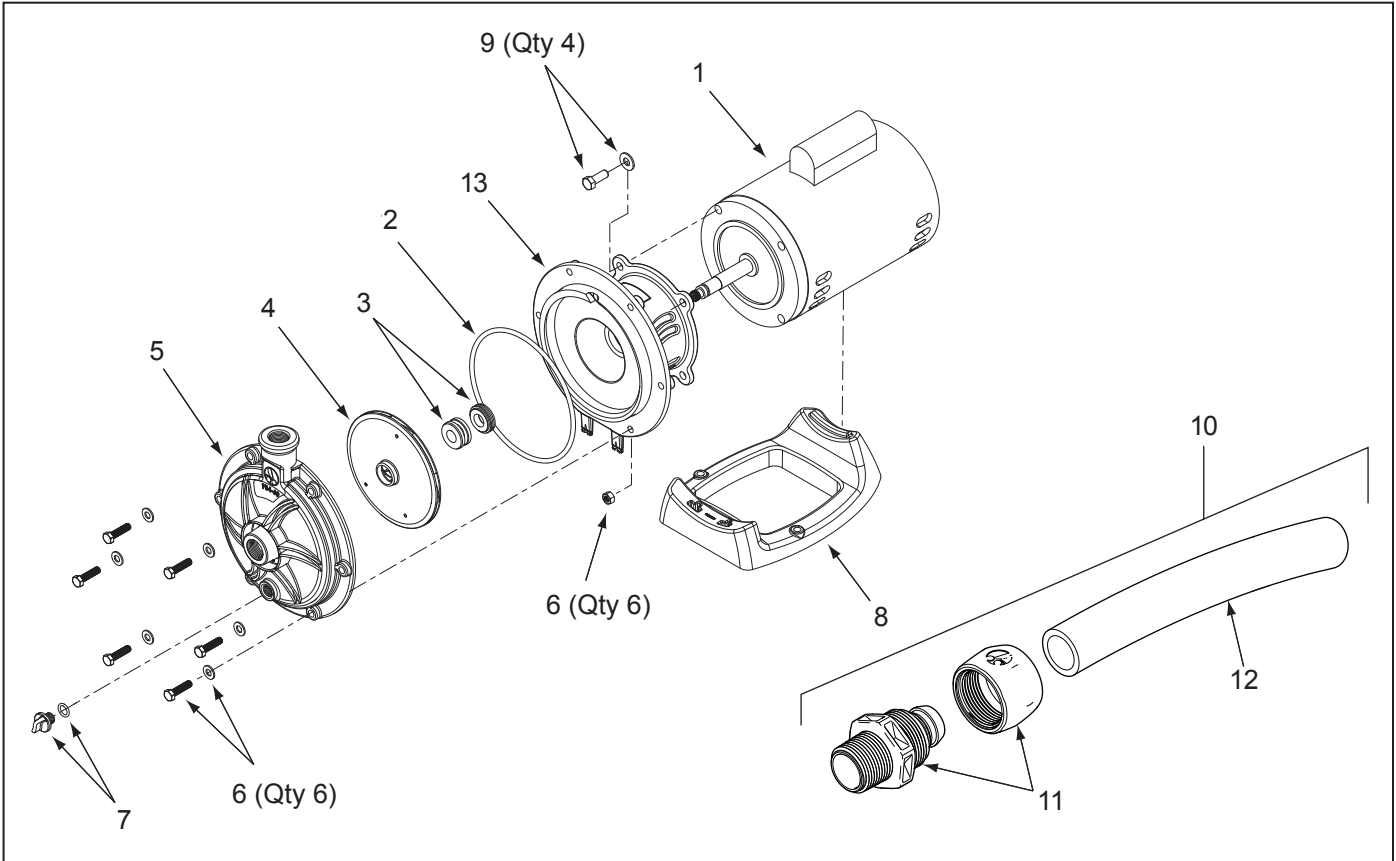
Polaris PB4-60 Booster Pump Exploded View
